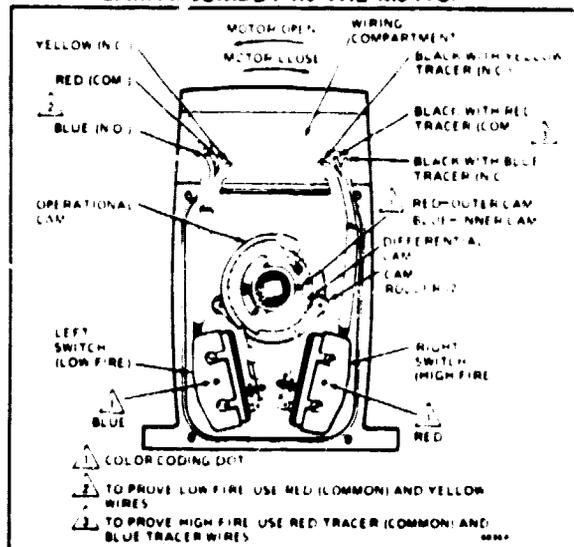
LOCATION OF AUXILIARY SWITCH AND CAM ASSEMBLY IN THE M941D.
